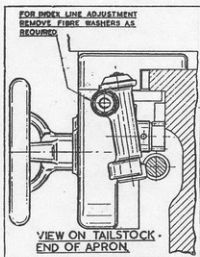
Thread Dial Indicator Mounting for ML7 Lathe
